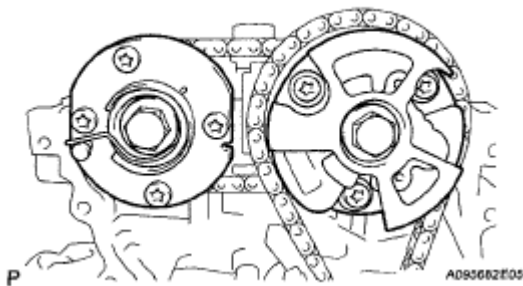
Identifying Camshaft Timing Gear Assembly Position
